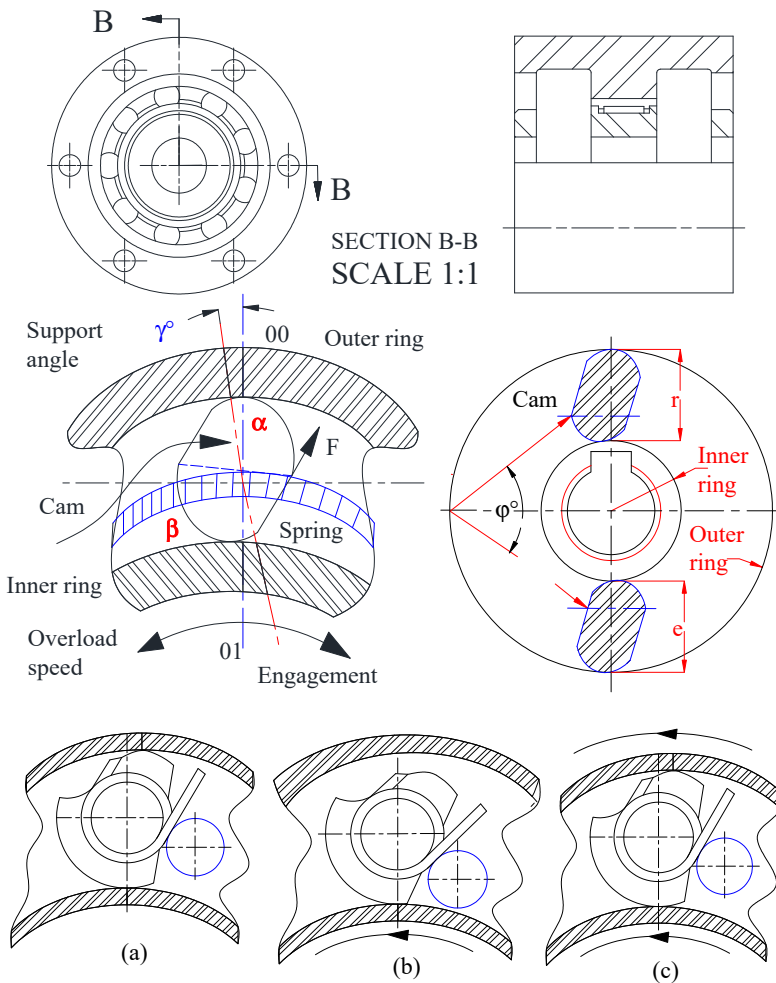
Components of gear system: bearing, cam, springs and cages. (a) Cam stationary; (b) inner and outer rings locked, during rotation of the mechanism; and (c) only the inner ring is rotating. R = reduced shrinkage; e = reduced gap and φ is a slight inclination. For a color version of this figure, see www.iste.co.uk/grous/design.zip
